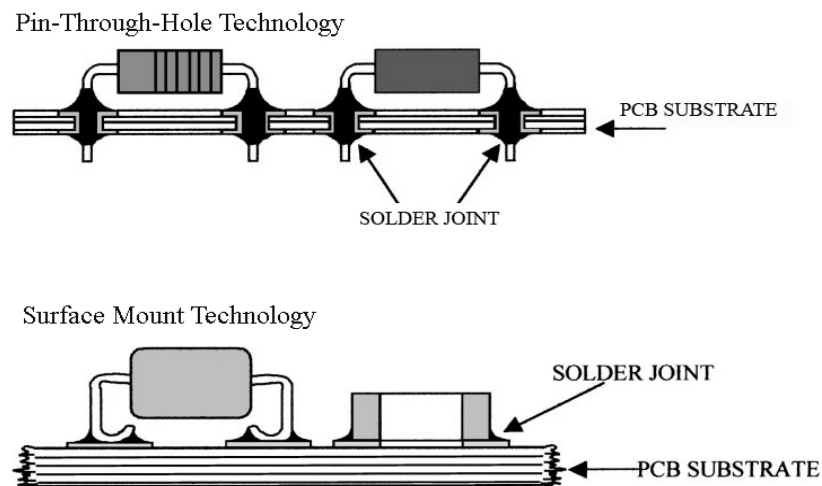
Solder joint in electronic assembly (Abtew and Selvaduray, 2000)
